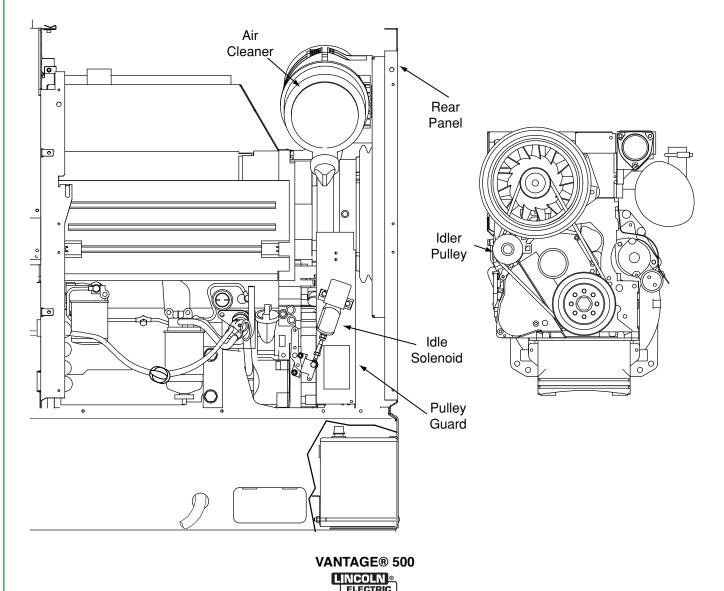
COOLING BLOWER BELT REPLACEMENT AND ADJUSTING
